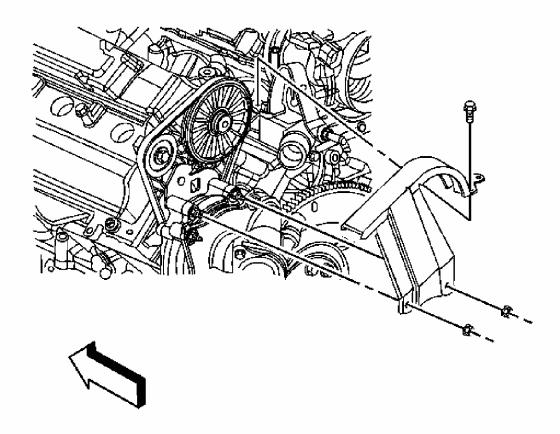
View Of Water Pump Drive Belt Tensioner Shield Courtesy of GENERAL MOTORS CORP.
